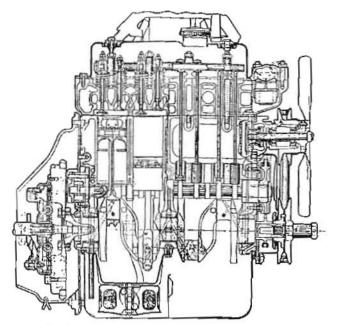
Sectional arrangement of 803 c.c. and 948 c.c. engines
